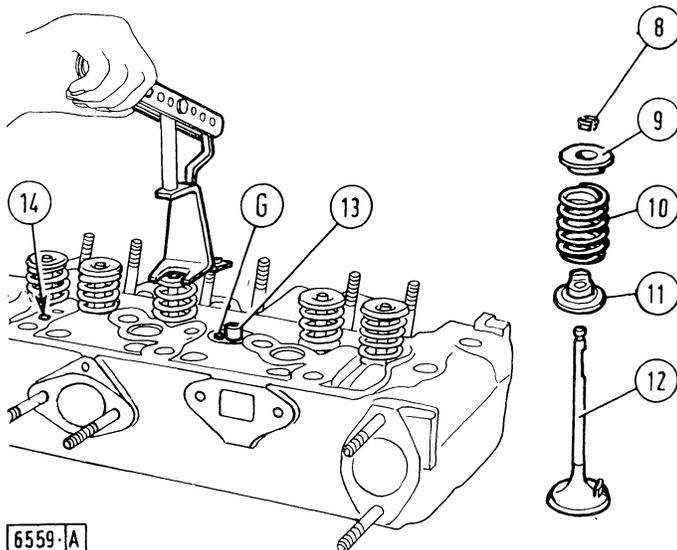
Removing (or Refitting) the Valves and Springs Using Tool Part No. 291050
